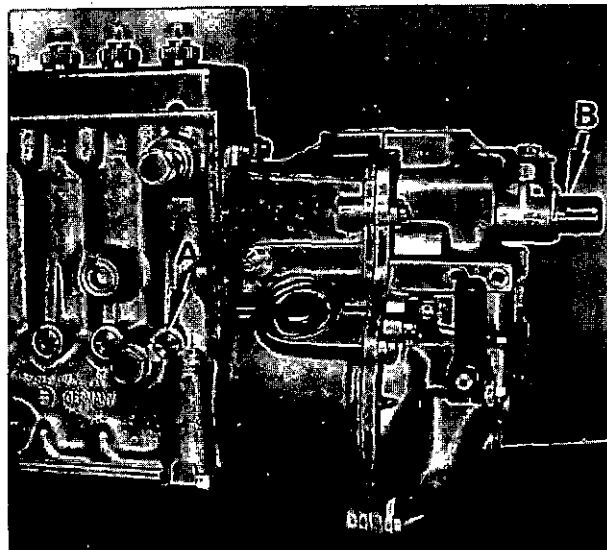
Tappet access plug 'A'. Rack stop locknut 'B'
